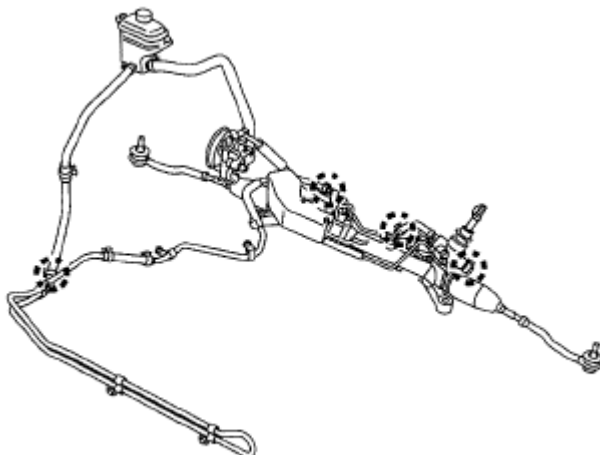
Identifying Return Hose Clamp & Pressure Hose Bracket
